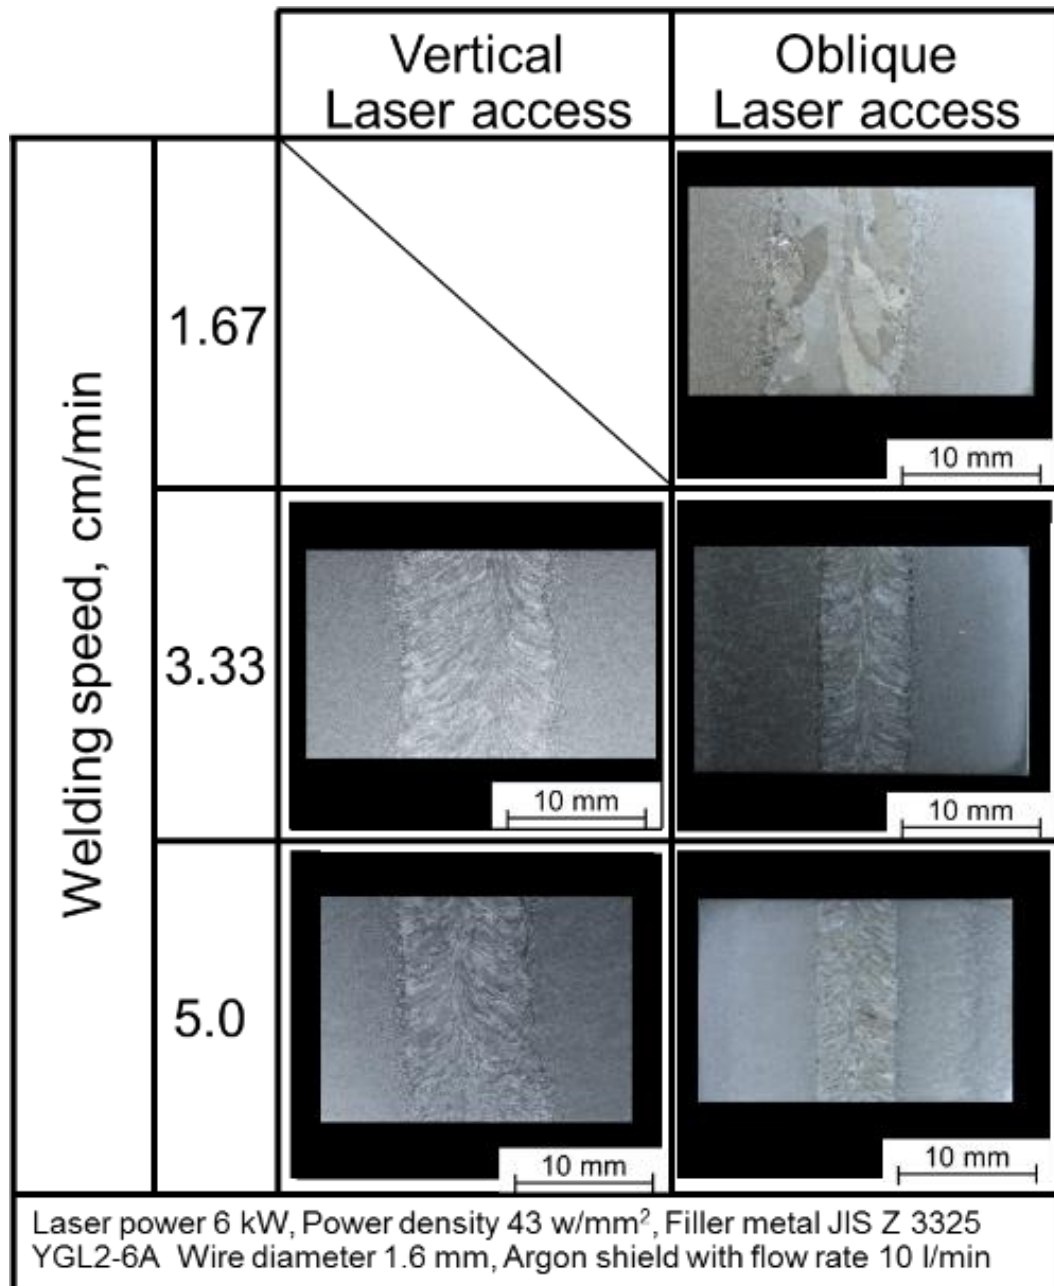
Macro photographs of center thickness cross section with parallel welding direction
